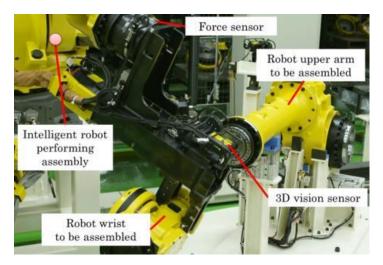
Assembly of a robot by a robot (Robot Assembly Factory at FANUC)
